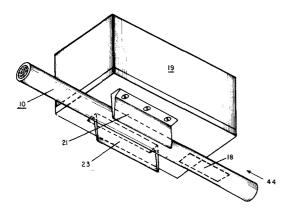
Perspective of the RF detector assembly and a cable under test.
